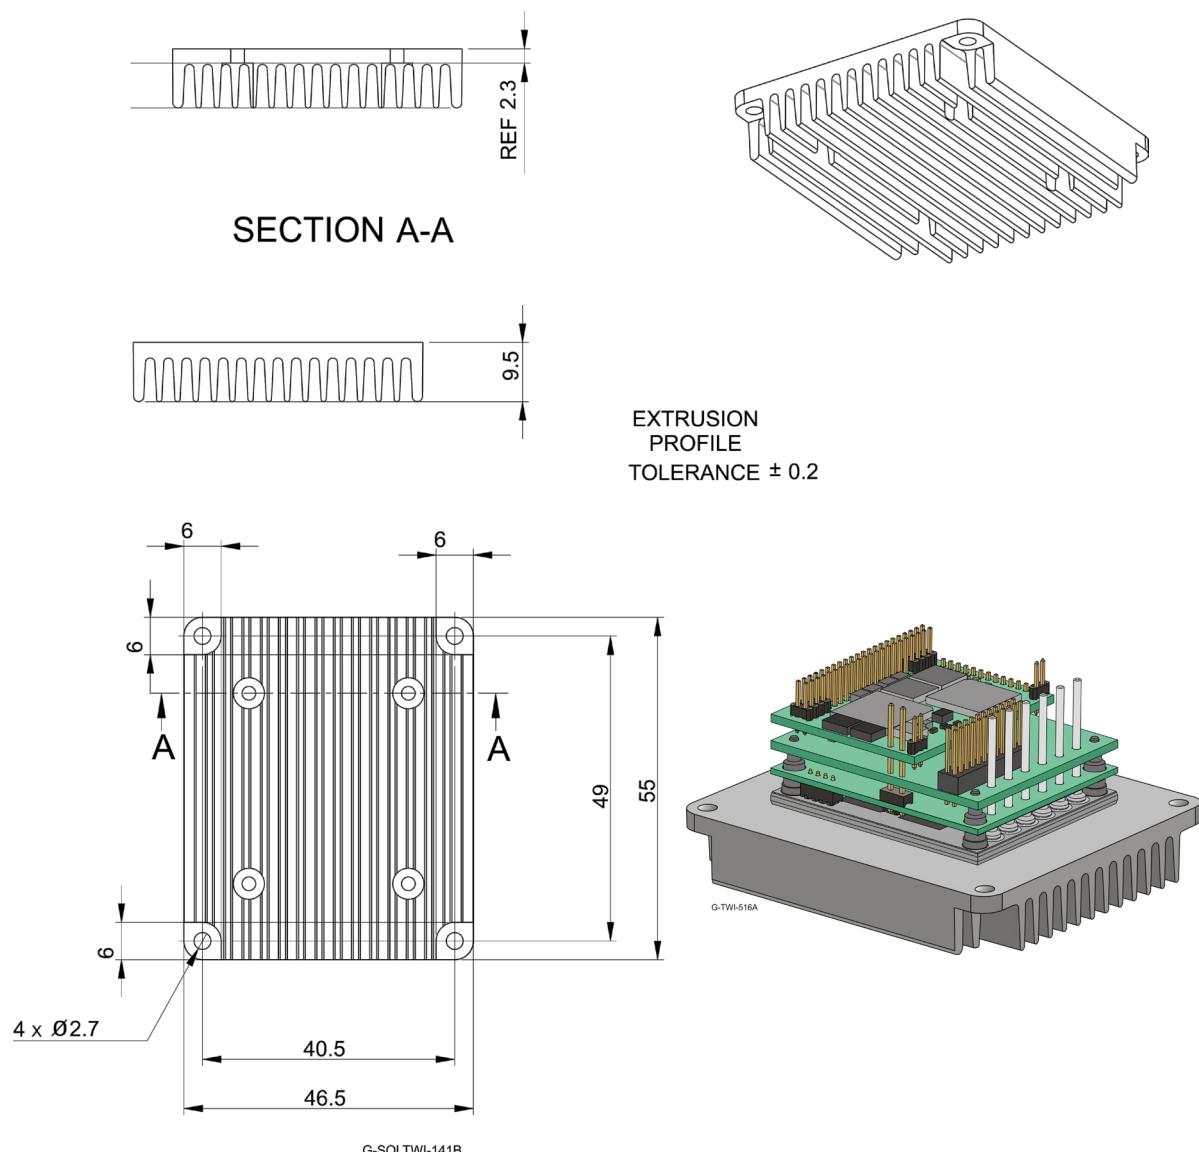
G-Twitter – Flat Heat Sink (P/N G-TWIHSFLAT01) Dimensions
